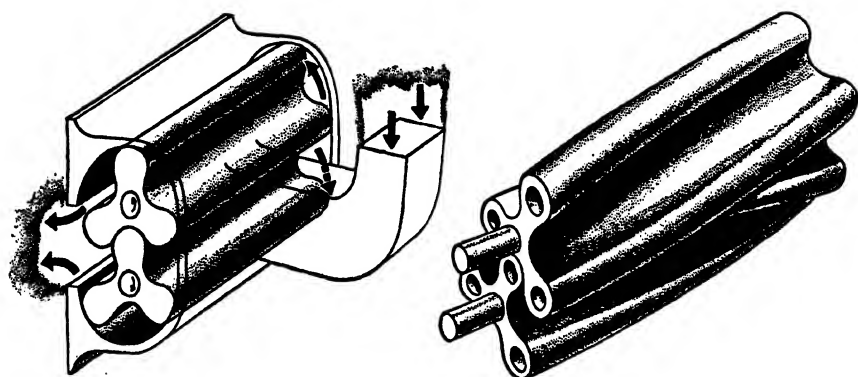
Positive displacement blower-lobe type. (Courtesy General Motors Corp.)
